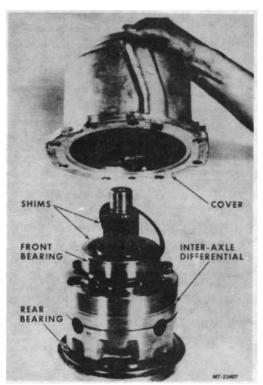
Shims For Limiting Differential Case-To-Cover (Nose Cone) End Play
